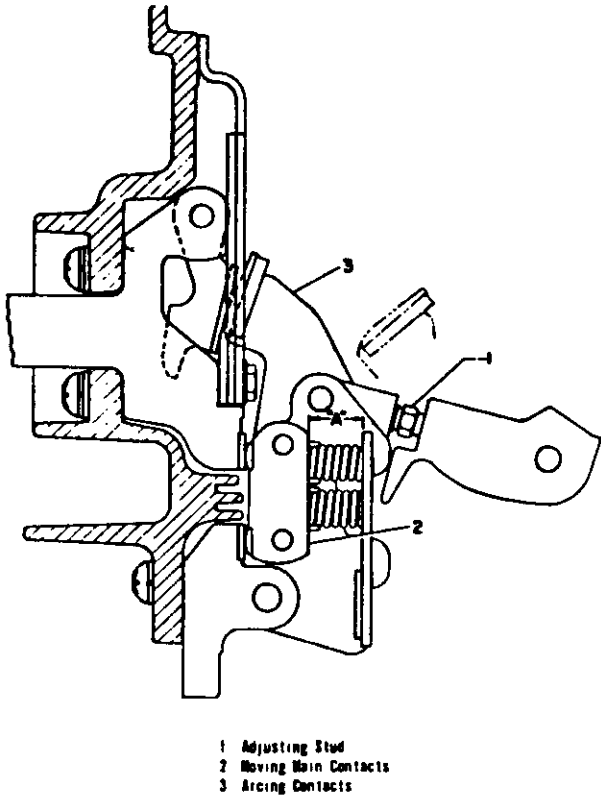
Contact Adjustment for Type K-1600, K-2000, K-1600S and K-2000S Circuit Breakers
